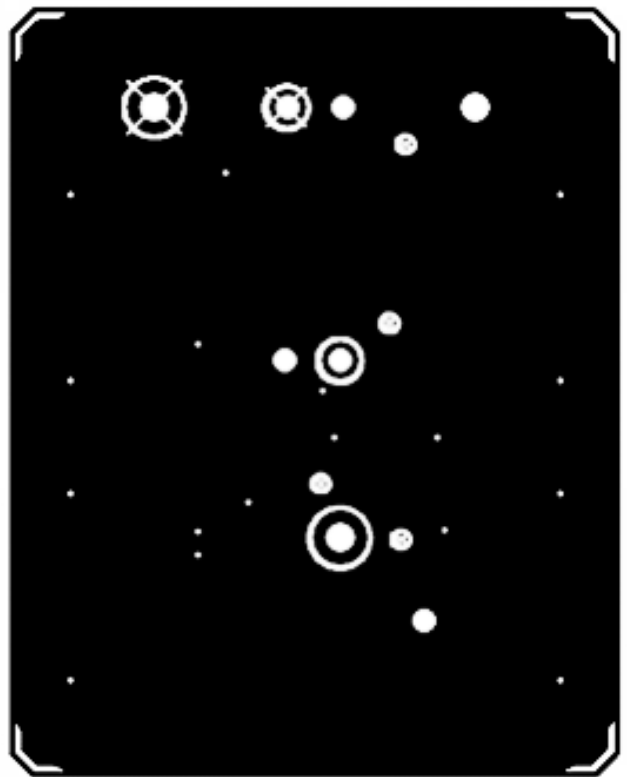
ADA4433-1BCP-EBZ Board Layout Pattern, Secondary Side
